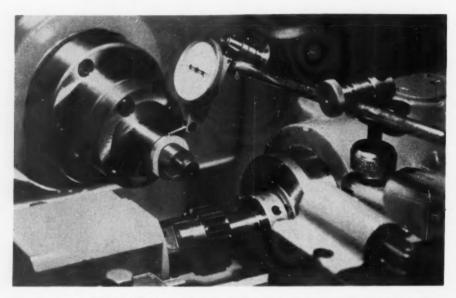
Before hobbing, blank is adjusted so that it is concentric with center of arbor.
